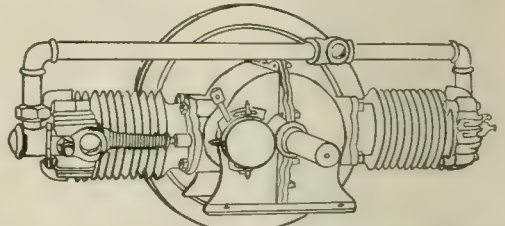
HORIZONTAL, TWO-CYLINDER, AIR-COOLED AUTOMOBILE ENGINE.
